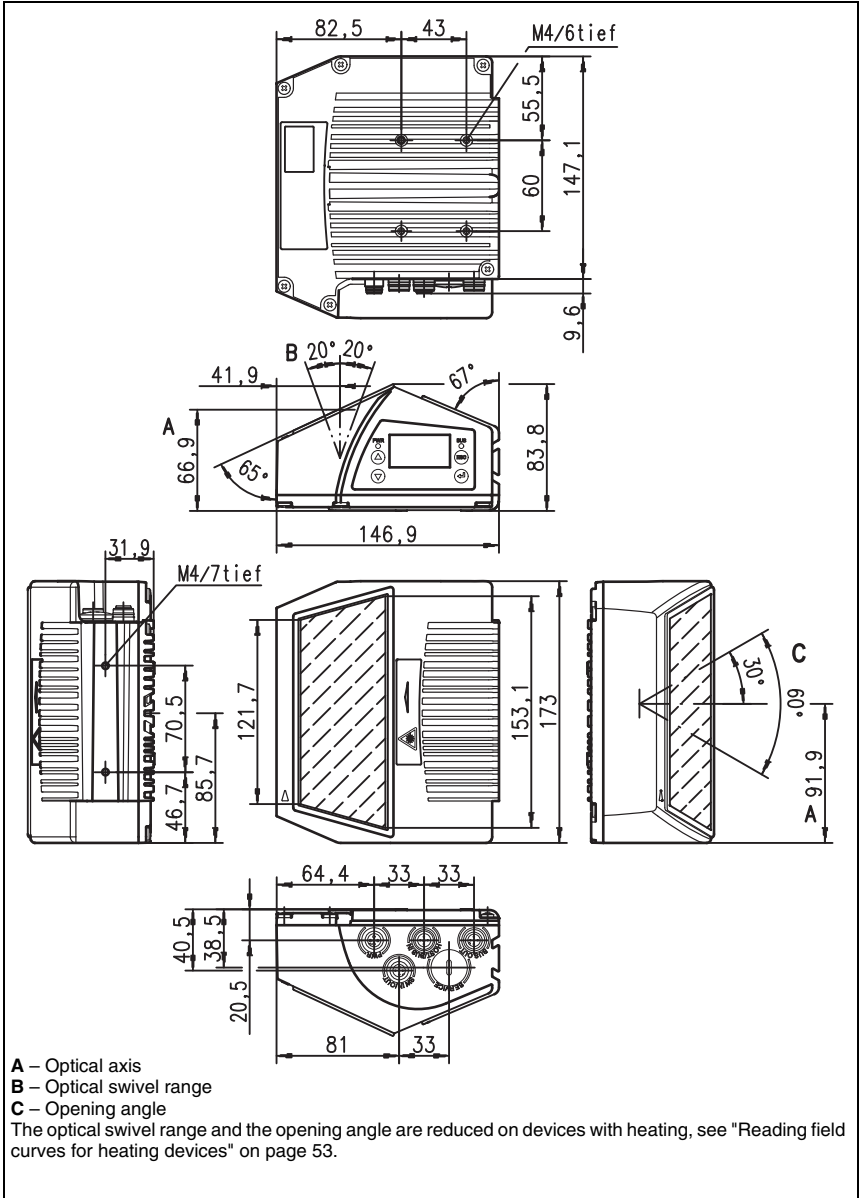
Dimensioned drawing BCL 508*i* oscillating-mirror scanner O...100
